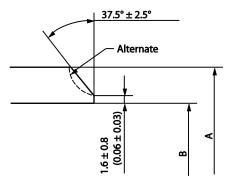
ASME B16.25 - weld bevel details for GTAW Root Pass with wall thickness from 3 mm up to 10 mm
